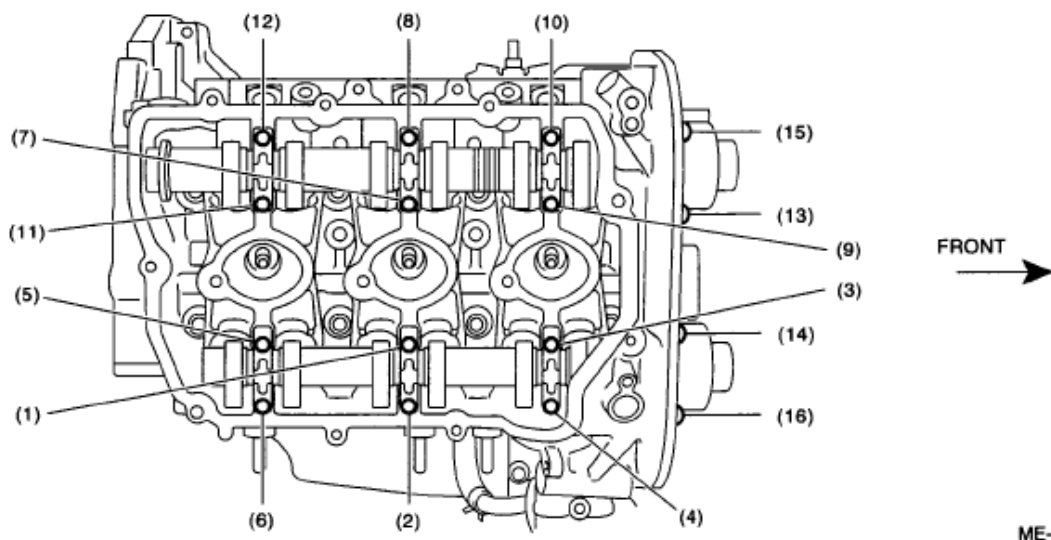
Identifying Camshaft Cap Bolts Tighten Sequence
